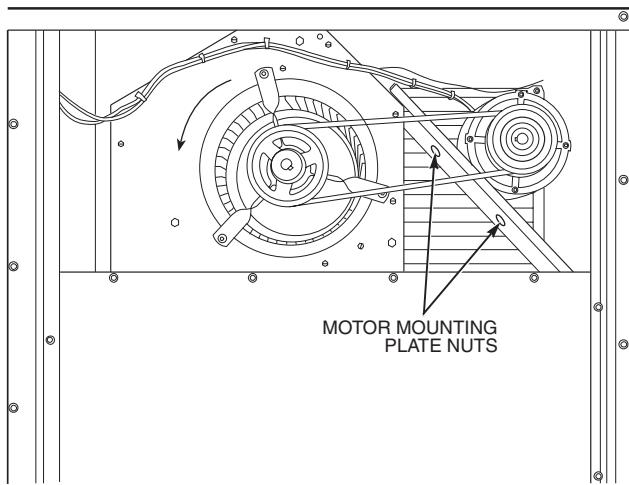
Typical Belt-Drive Motor Mounting for Size 008
